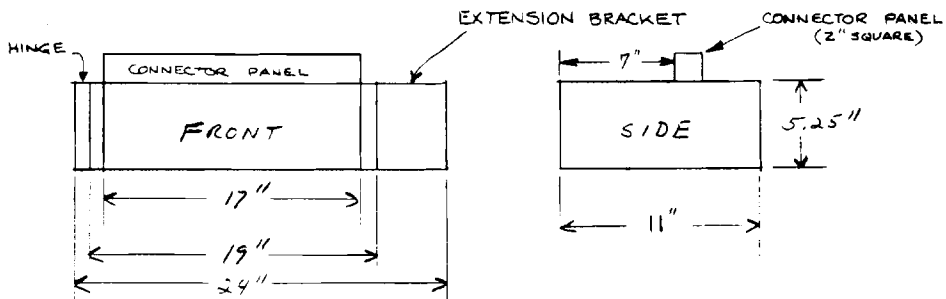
OUTLINE DIMENSIONS OF UNITS IN THE EPIC
